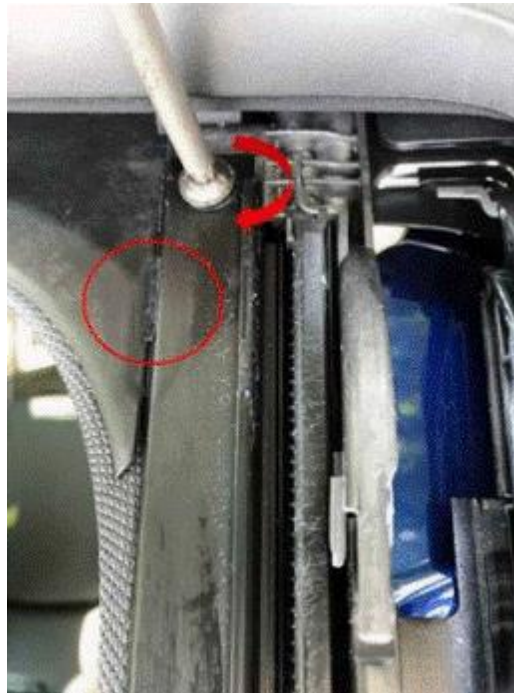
Tightening of the screw with the felt strip material isolating the guide rail and the frame.
